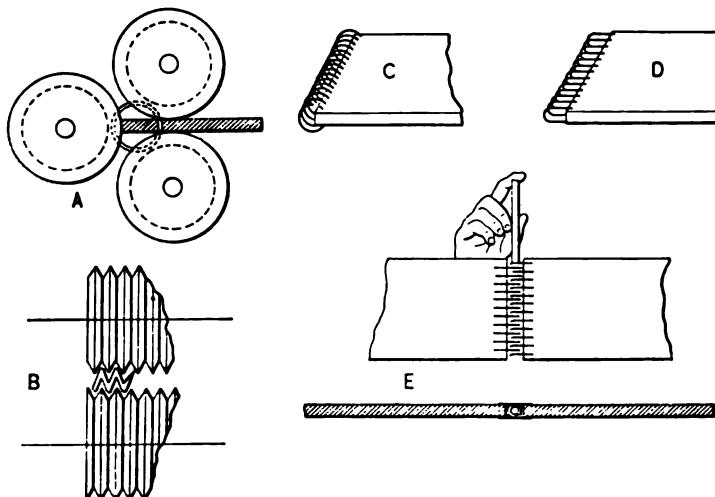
METHOD OF MAKING A WIRE-LACED HINGE JOINT.
